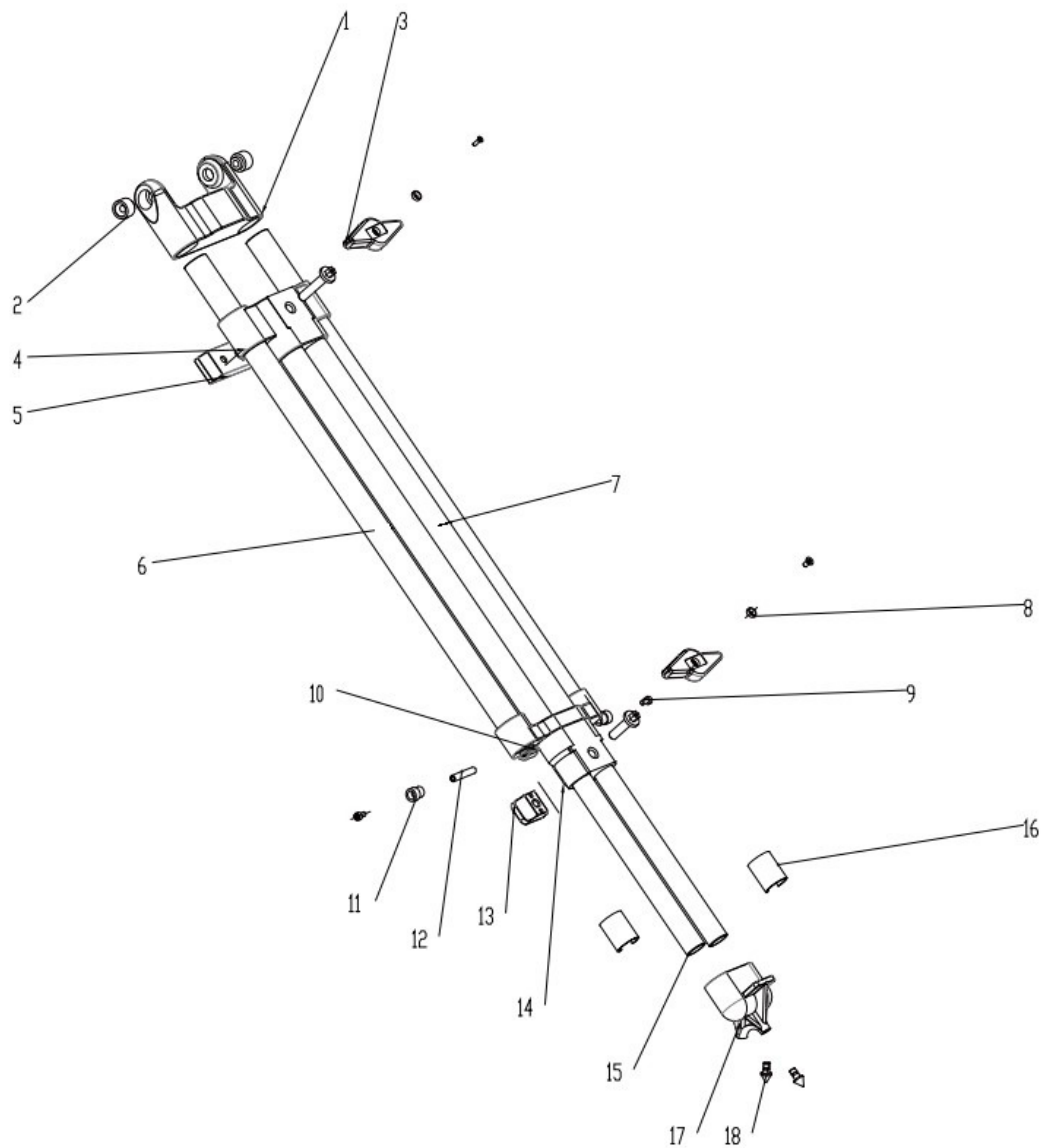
SC-EFP/CF150D Single Leg Section Assembly
